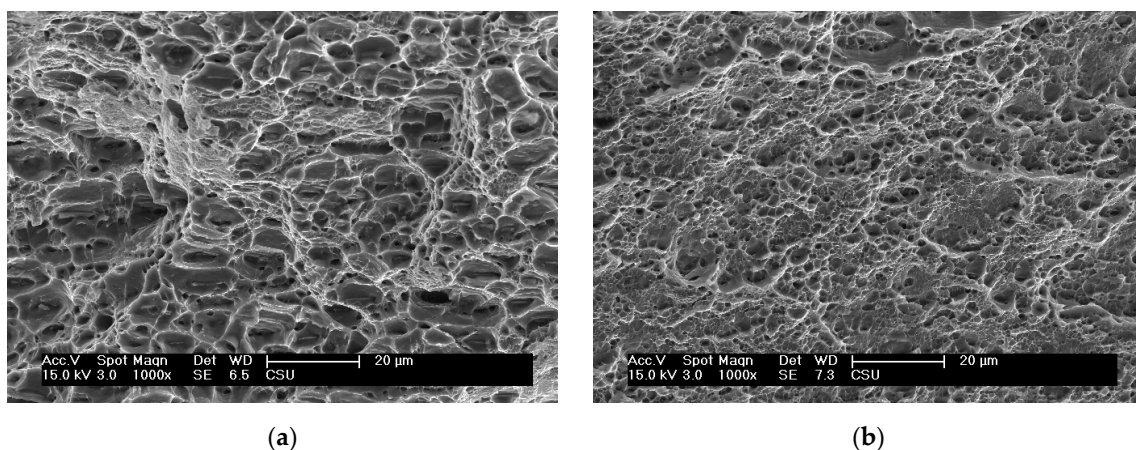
The fracture morphology of the base metal (a) and FSW welded joint obtained (b) by SEM.
